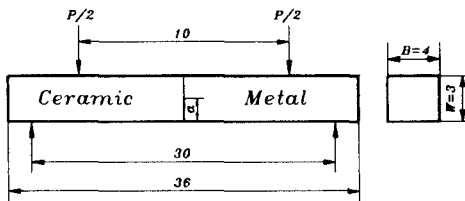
Shape and dimension of ceramic/metal bonded joint
